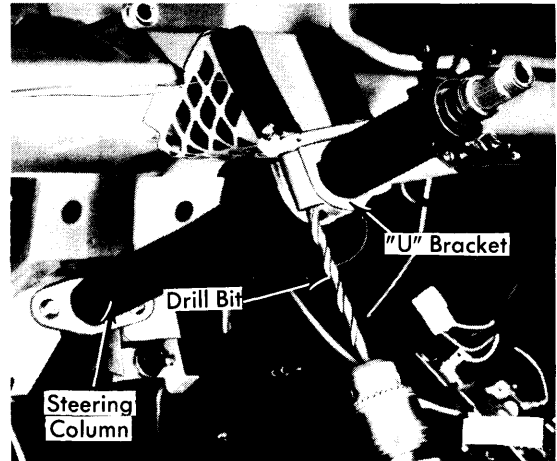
Using a Drill to Remove Steering Column Shear Bolts
